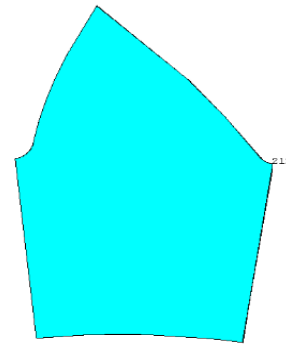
Pointed tooth with 45° pressure angle on drive side, 4 mm module and X=0
